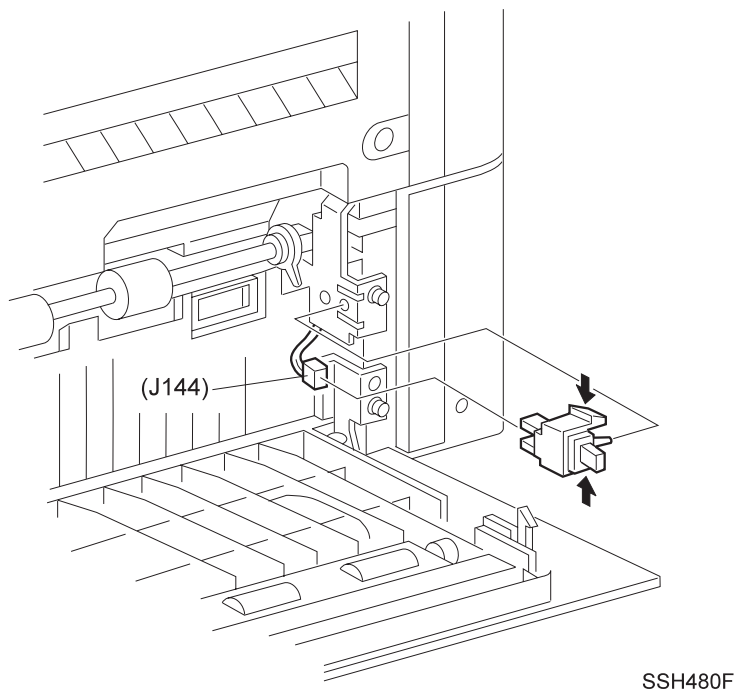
Removal of Left Lower Cover Interlock Switch
